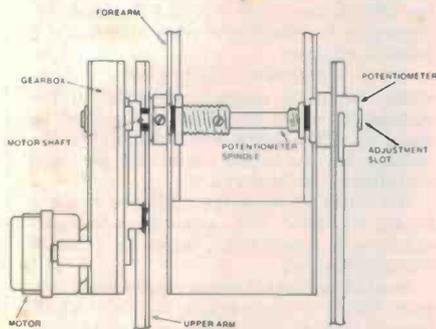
View of the elbow, showing how the motor drives the forearm assembly, plus the coupling to the position pot.
